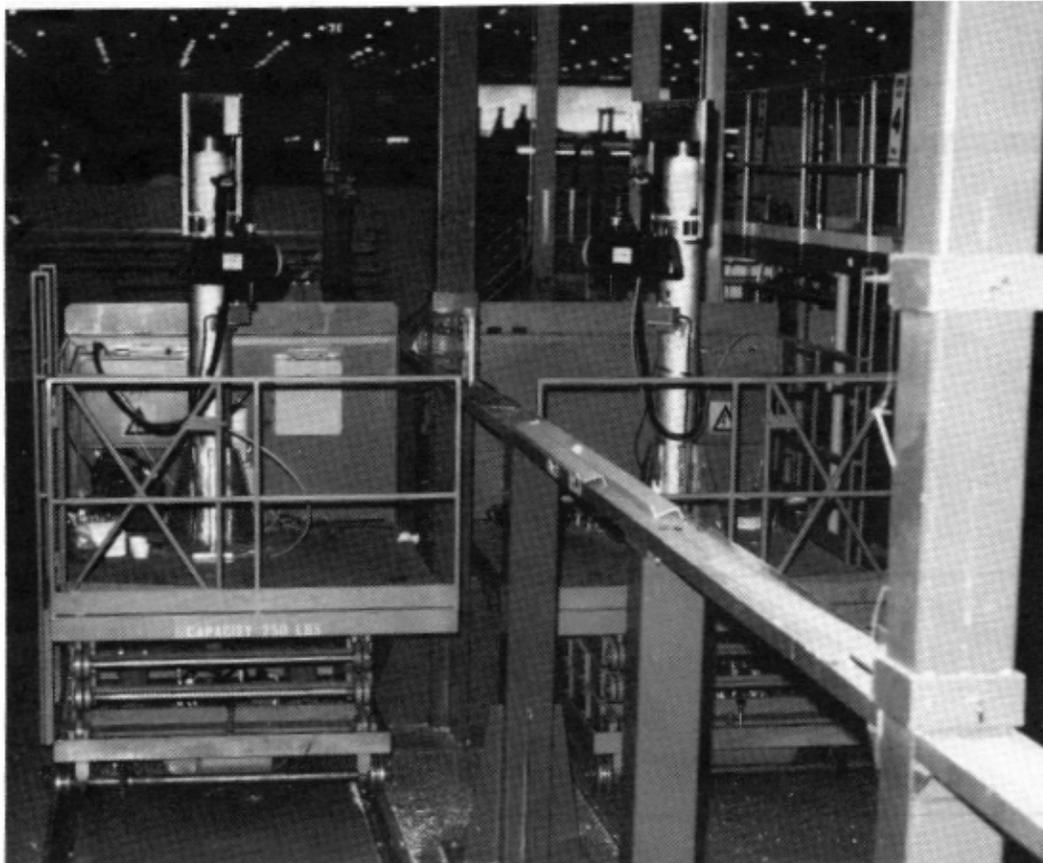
Unloaded Floor Assembly Station with Scissors Lifts
